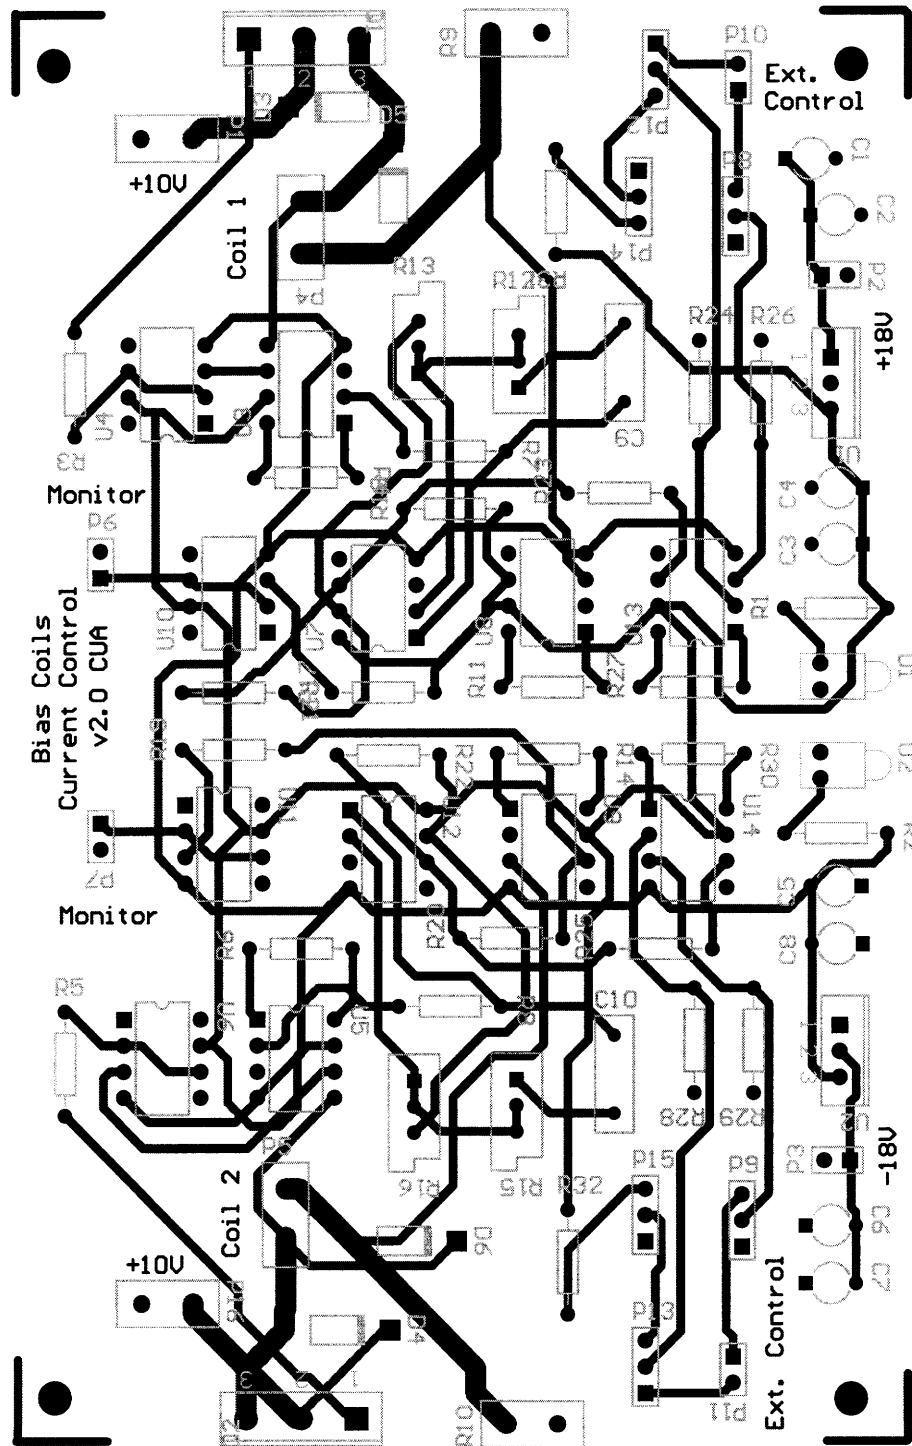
Printed circuit board layout for a pair of bias coil controllers.
